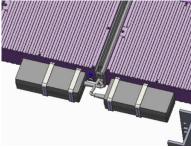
V300-8T-2X Dual Rack Mounting with PSU
